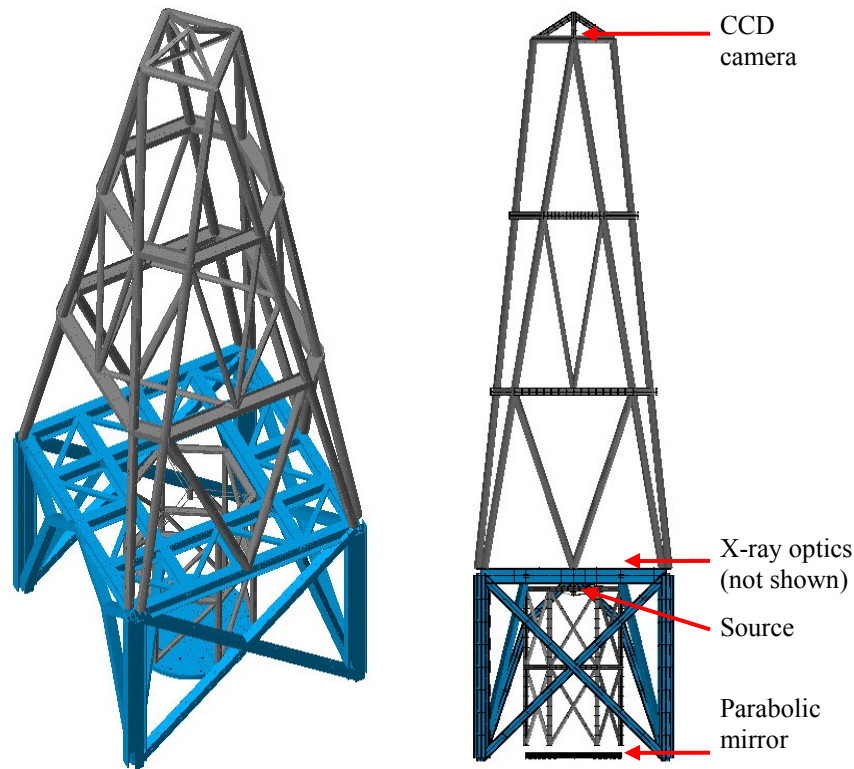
Sketch of a possible configuration of the optical bench for the integration of the Athena flight module. Isometric view (left) and front view (right).
